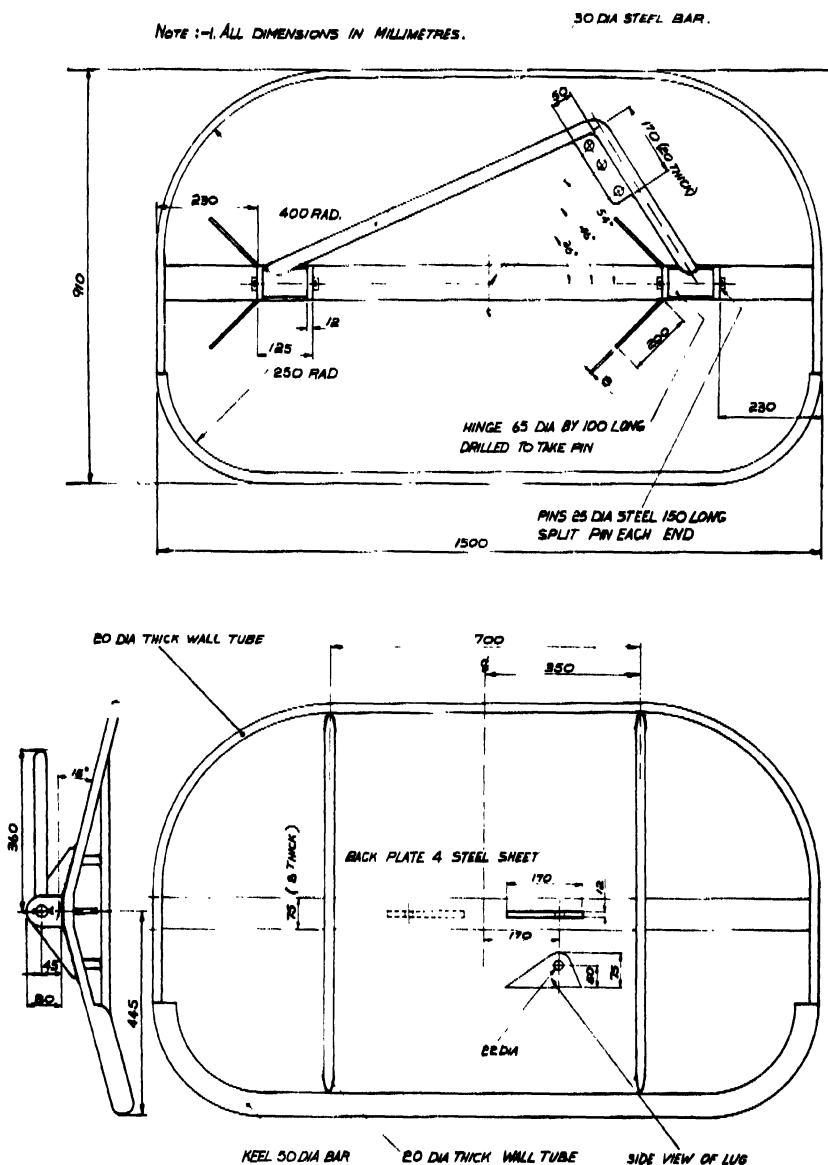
Construction drawing of a rectangular Vee type otter board of about 1.3 m<sup>2</sup>.
